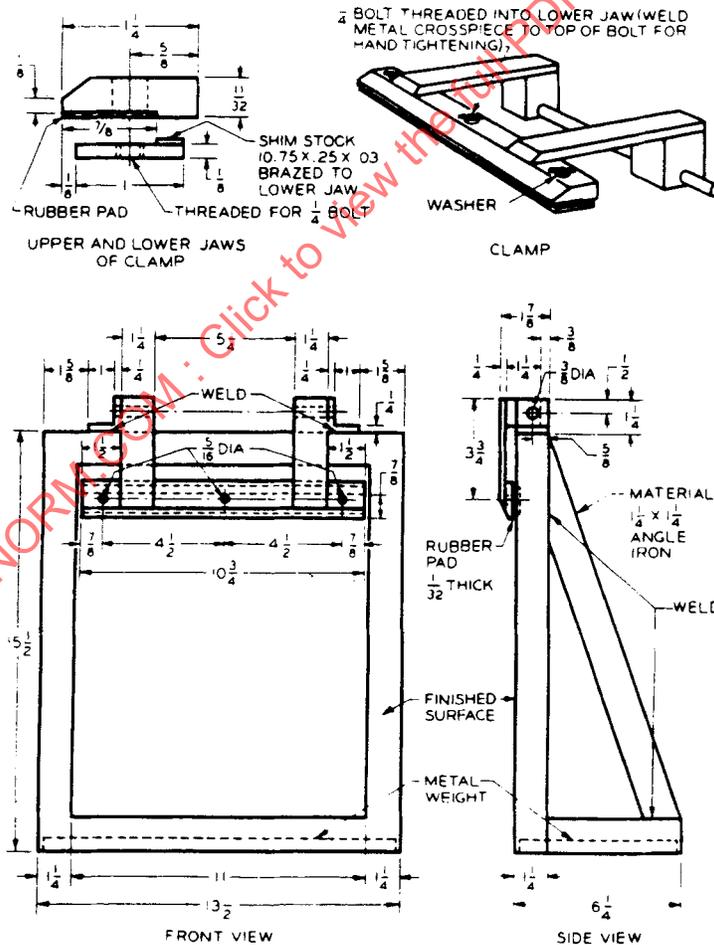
DETAILED VIEW OF SLAMMING FIXTURE FOR COLD ADHESION TEST
